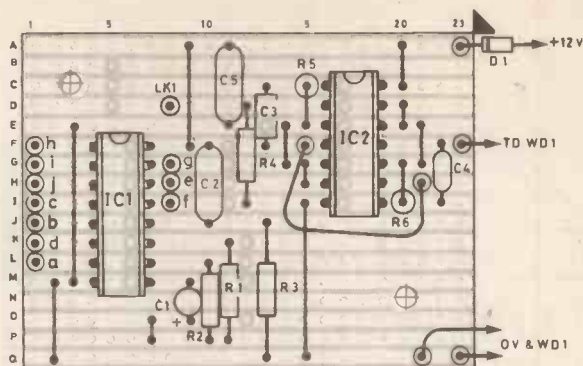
Component layout and printed circuit master (full size), see EE PCB Service. Note a link wire should be attached to LK1 and one of the timing pins.
